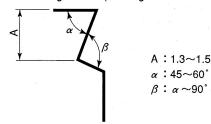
Configuration of groove on measuring object (ASTM Std.)
